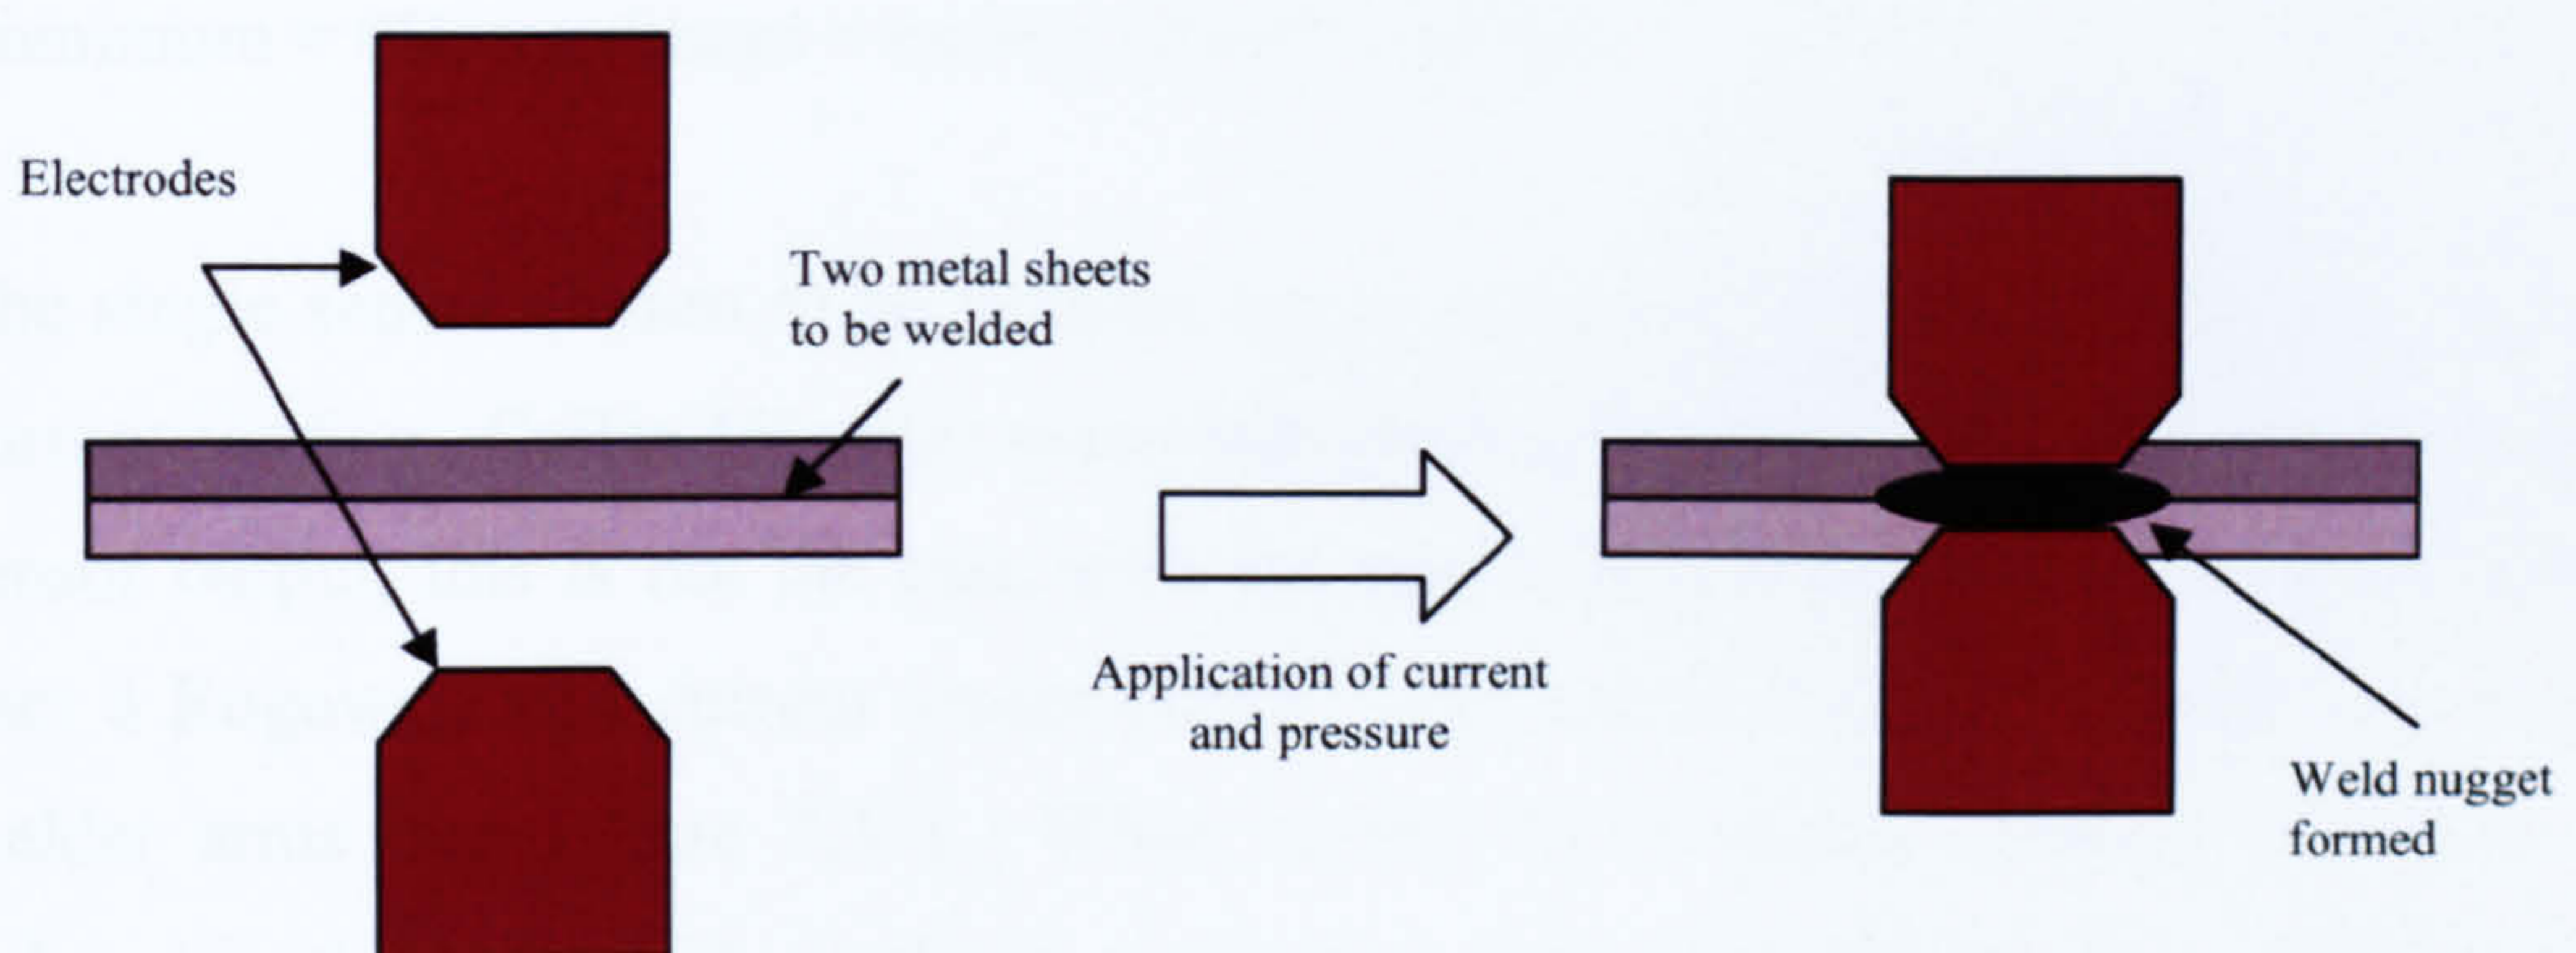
Formation of a weld nugget using spot welding
